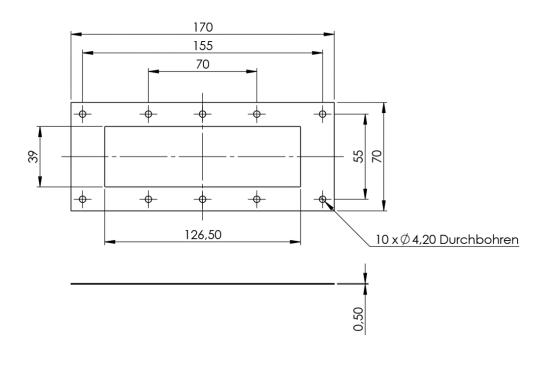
Technical drawing of the stainless steel plates. All numbers in mm.
